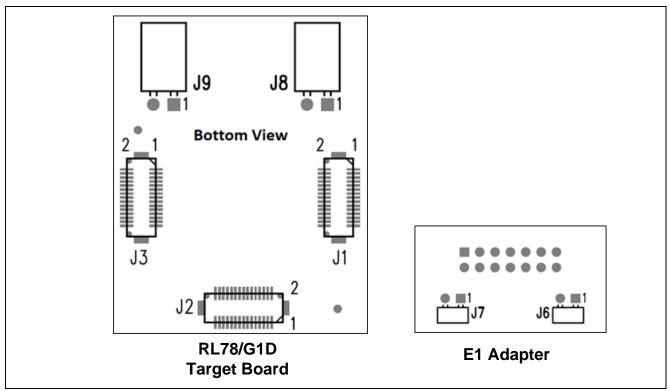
Connector pin assignment for RL78/G1D-SK Target Board
